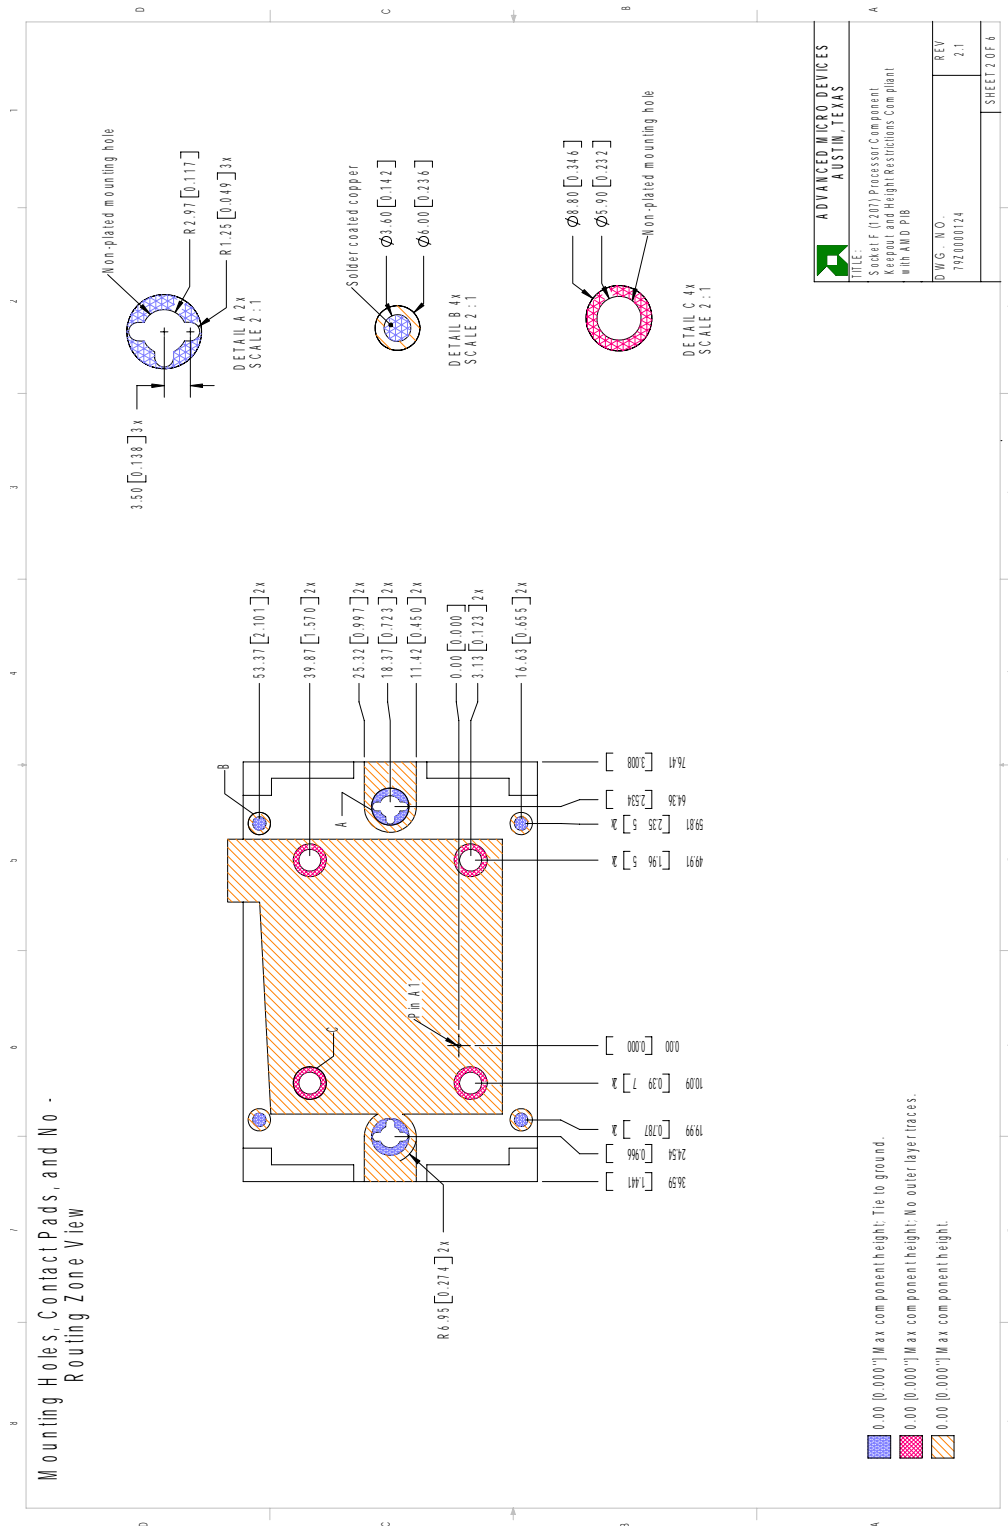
Socket F (1207) PIB Mounting Holes, Contact Pads, and No-Routing Zone
